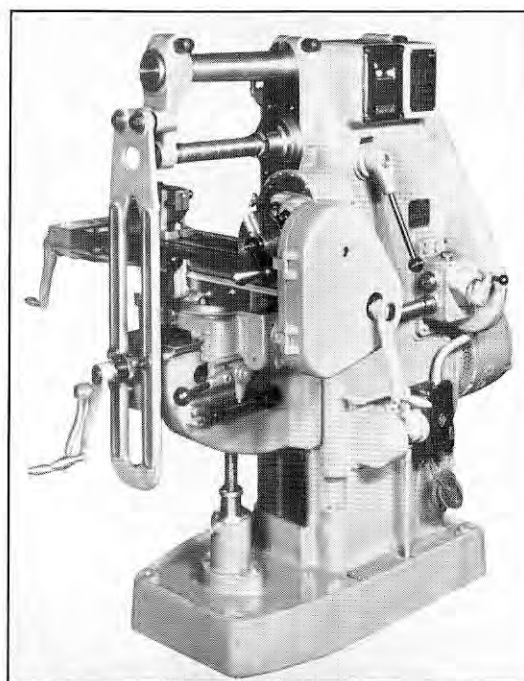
UNIVERSAL MILLING MACHINE; MIDGLEY & SUTCLIFFE, LTD.
